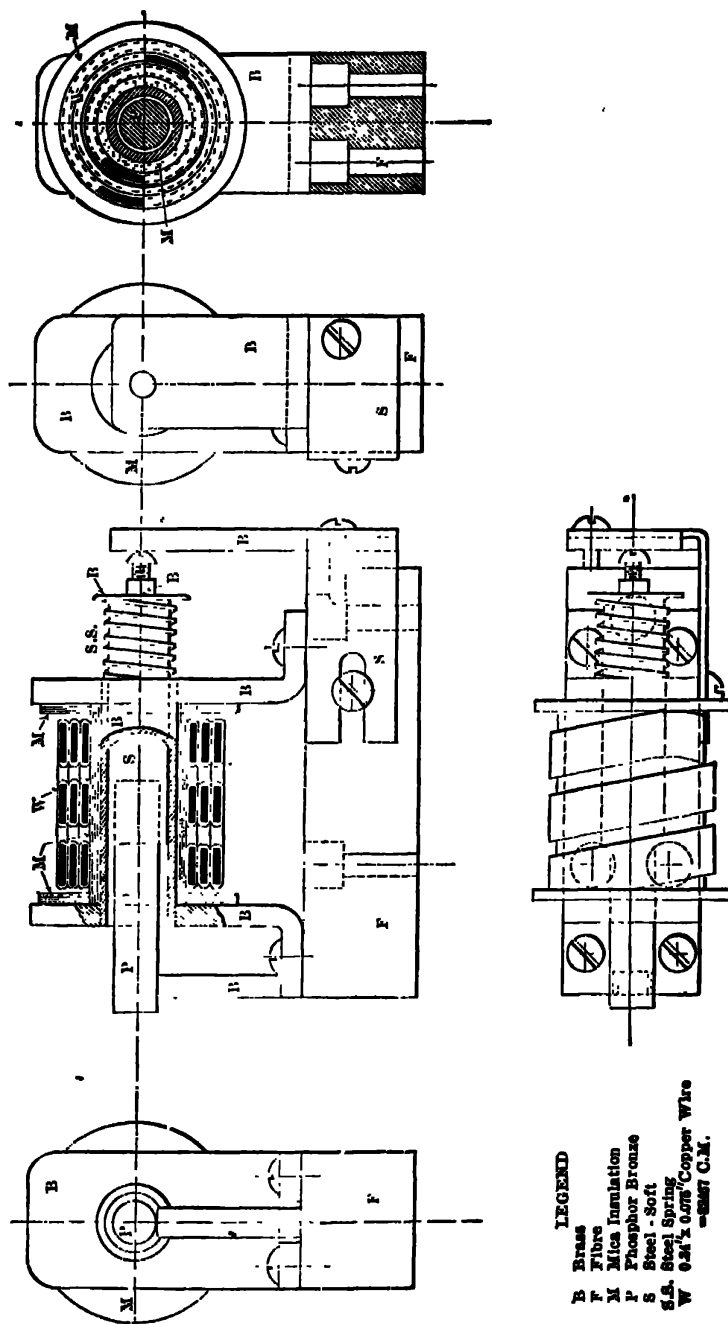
Plan, Elevation, and Section of Current-Limit Relay
